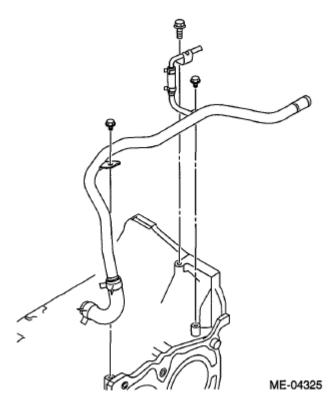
Identifying Blow-By Pipe Assembly, Blow-By Pipe, PCV Hose Assembly And Water Pipe
